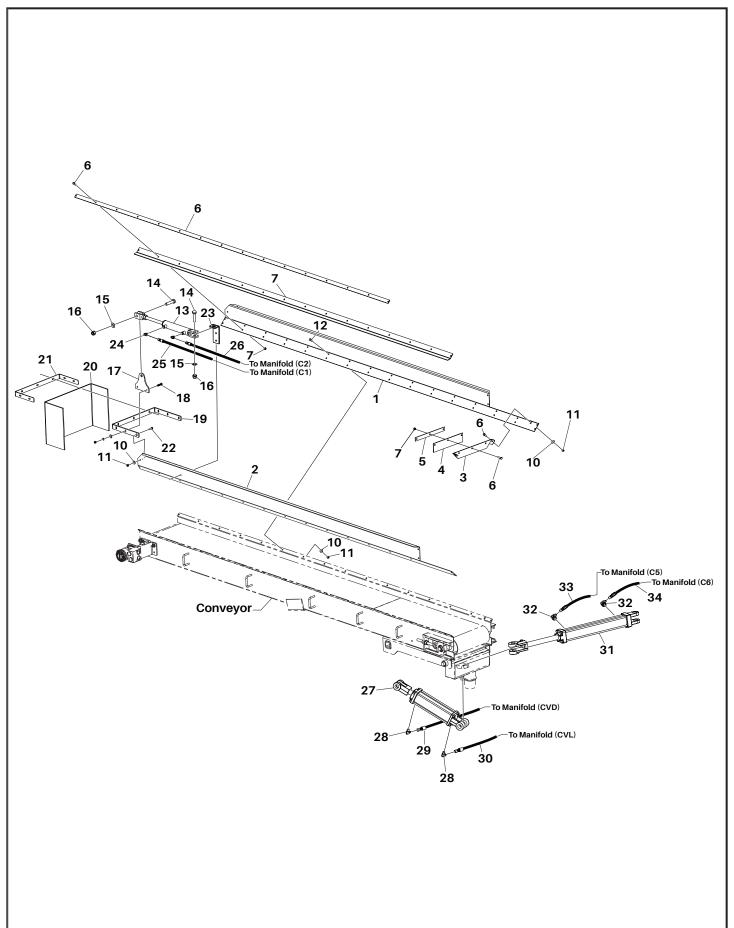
Side Conveyor Skirt and Chute Assembly
